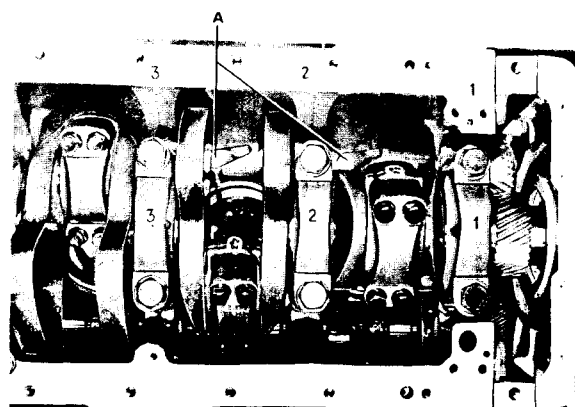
Marking of connecting rods, cylinder block and bearing caps
